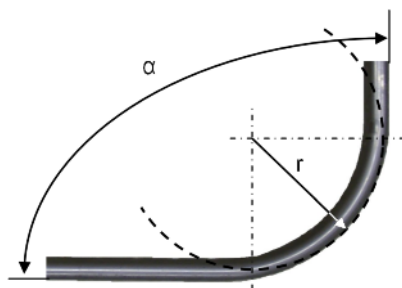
Tube geometry described by radius and bending angle α measured at the extrados.
